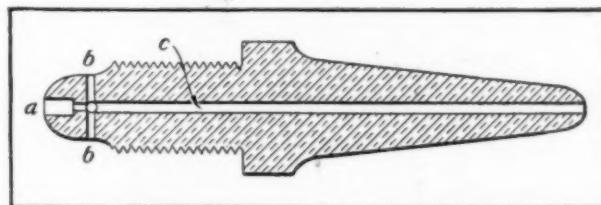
SECTIONAL VIEW OF DAVIS-BOURNONVILLE TORCH
